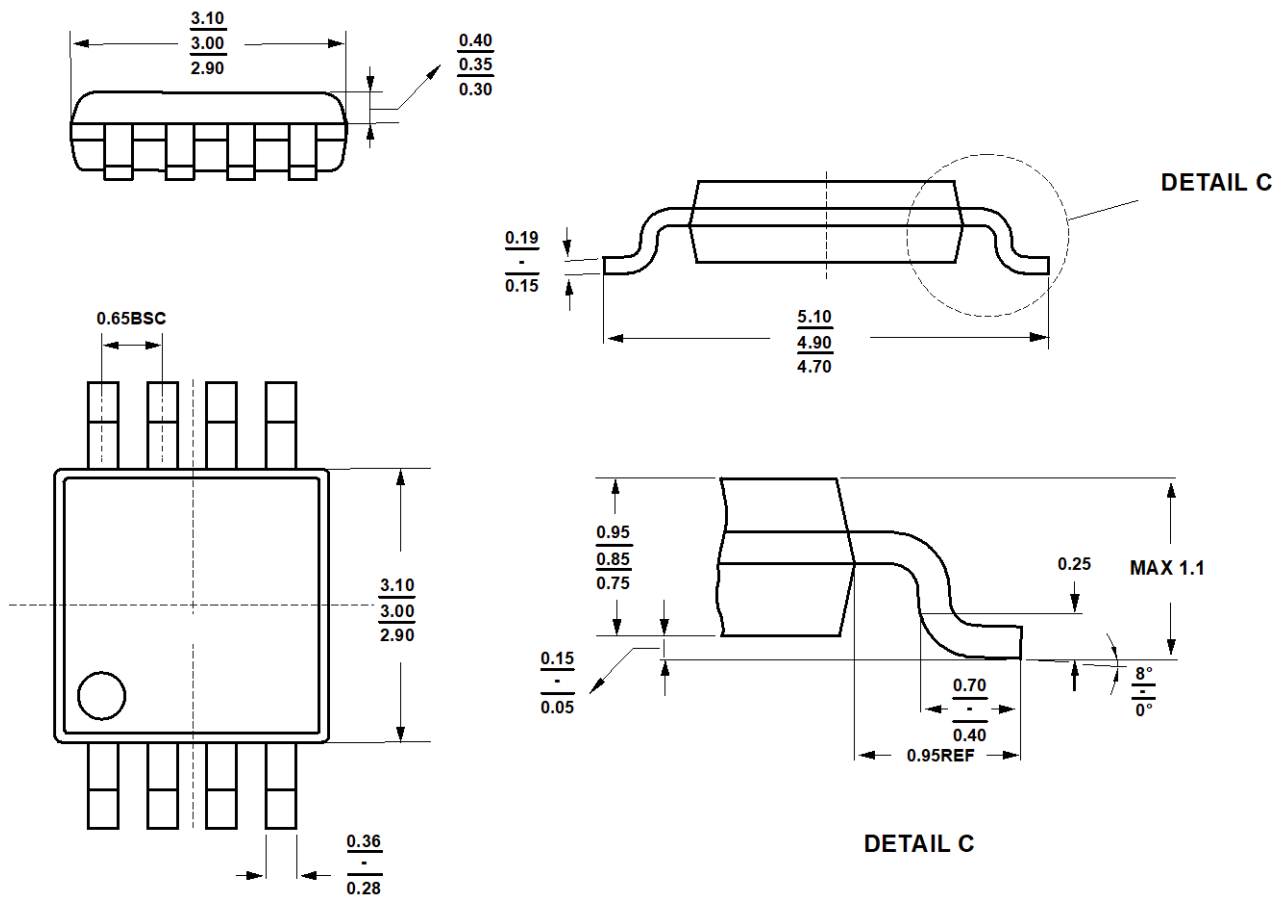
8-Lead MSOP Package Dimensions shown in millimeters
